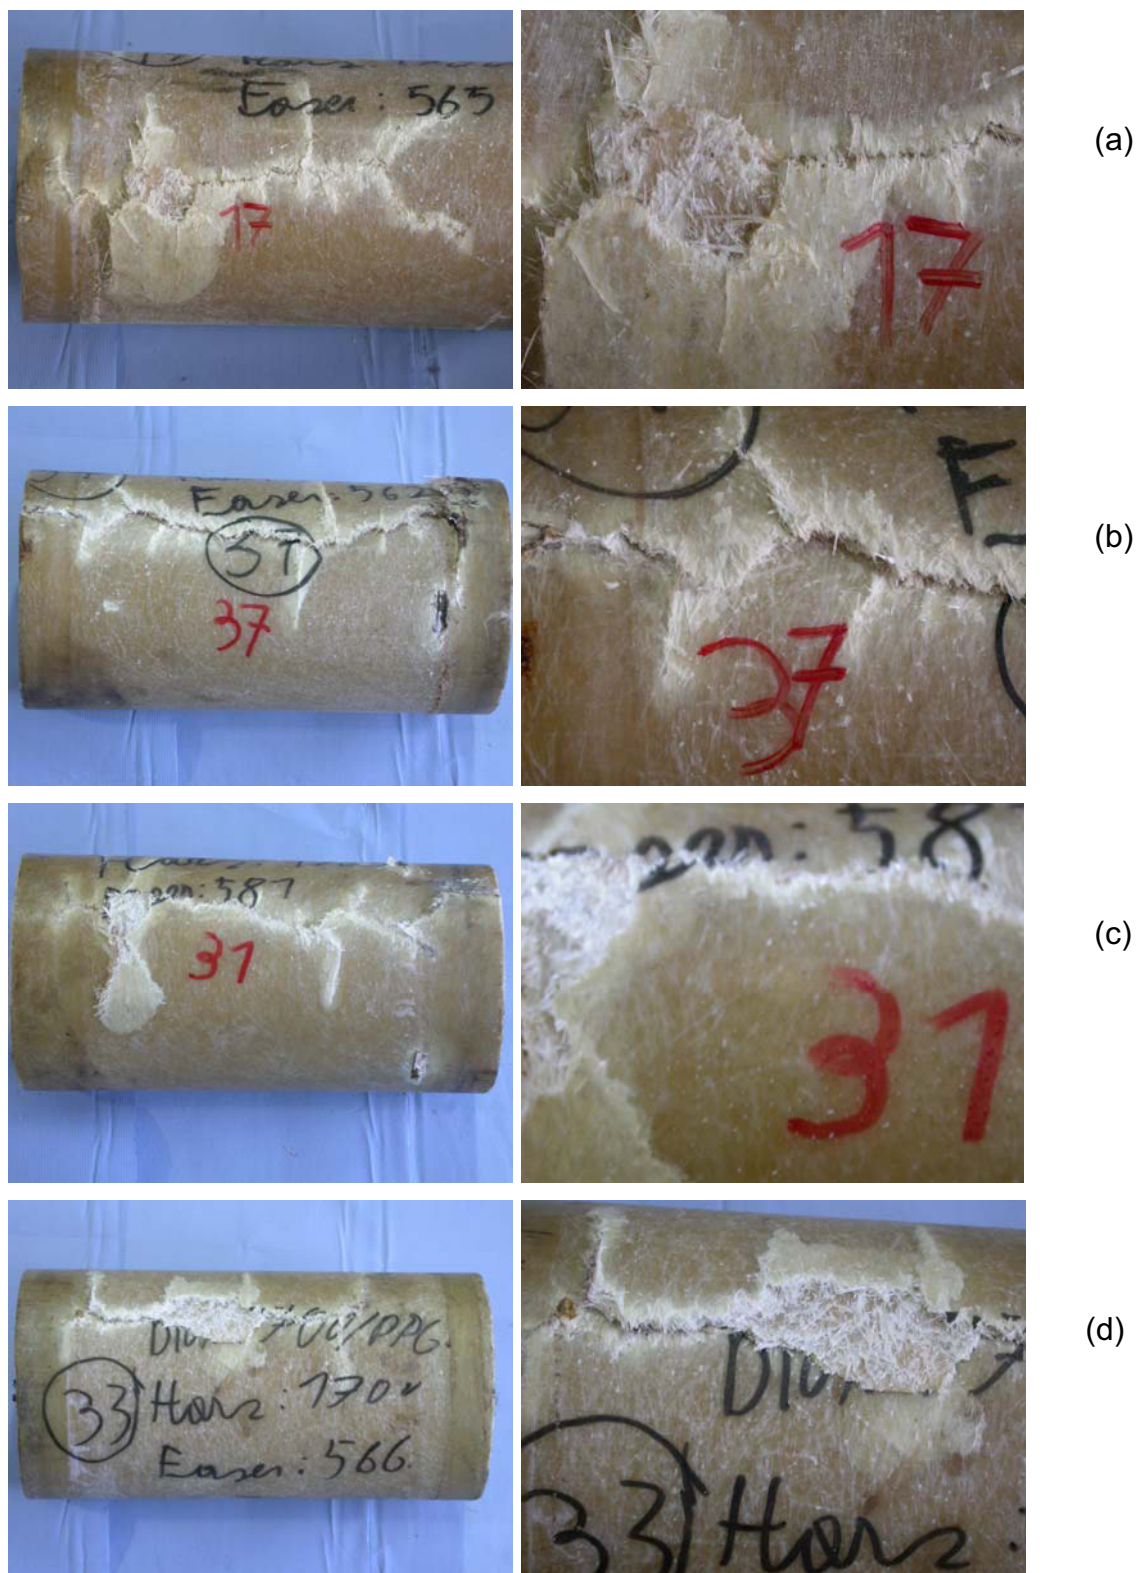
Pictures of fracture pattern from internal pressure test specimens. On the left side a macroscopic and on the right side a detailed picture is shown. Time until failure [h]: (a) 0.003, (b) 0.003, (c) 0.003, (d) 0.02.
